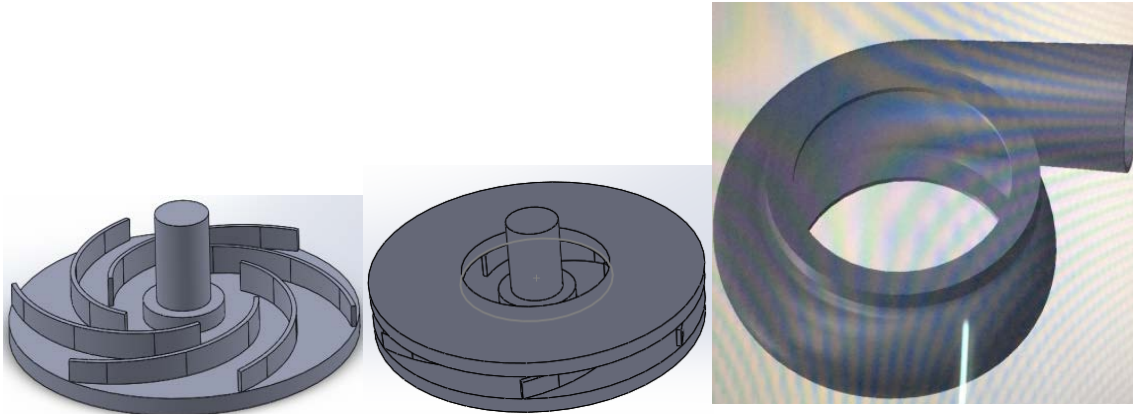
Three Dimensional View of Impeller and Casing for Designed Pump
